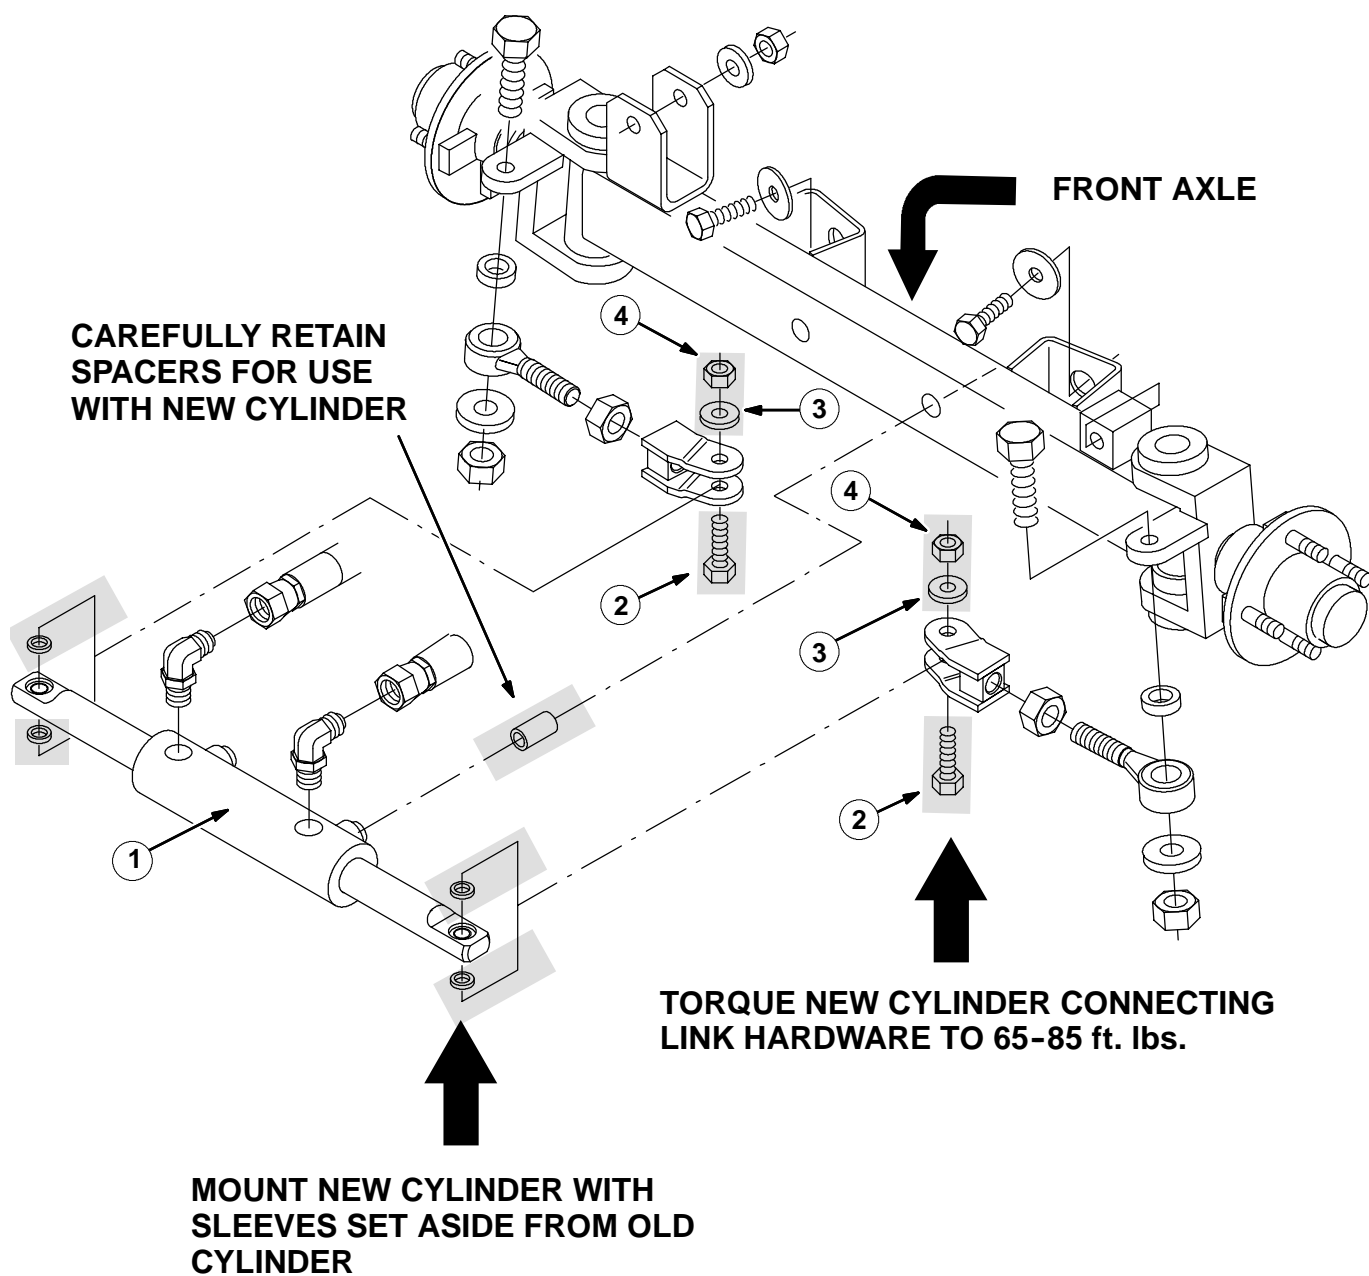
NEW HYDRAULIC CYLINDER INSTALLATION
